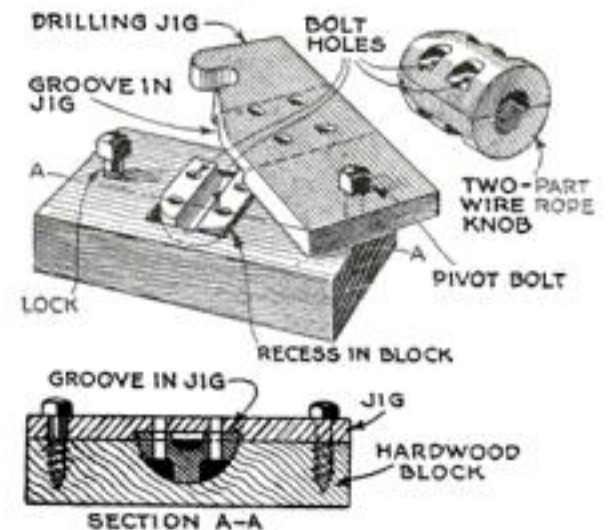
Jig with wooden base for drilling small quantities of knobs used on elevator cables.
